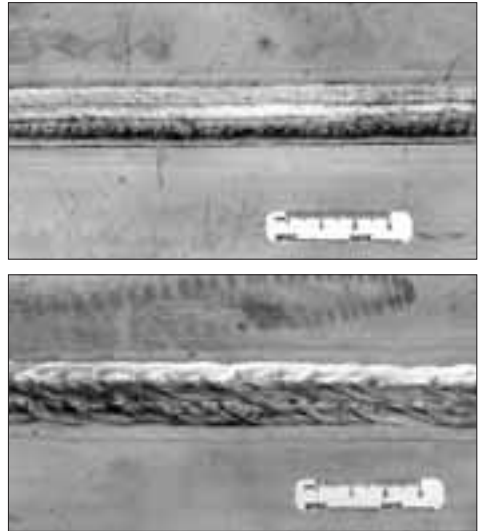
Pulsed arc (top) and spray arc (bottom) welding using P12 filler metal
